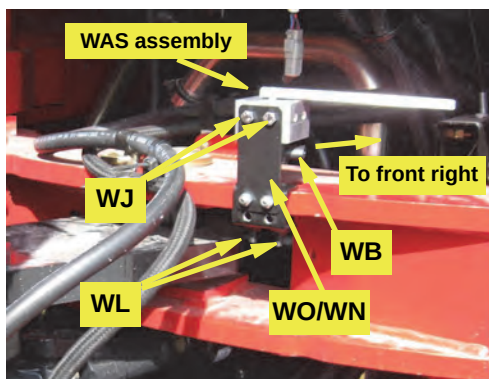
i: Installed WAS bracket assembly and WAS assembly.
